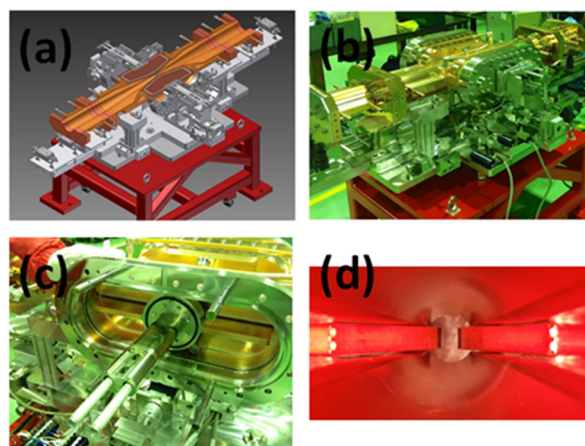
(a) Schematic drawing (cross-sectional view), (b) outside appearance, (c) installed collimator jaw, and (d) inside view of a horizontal-type collimator.
